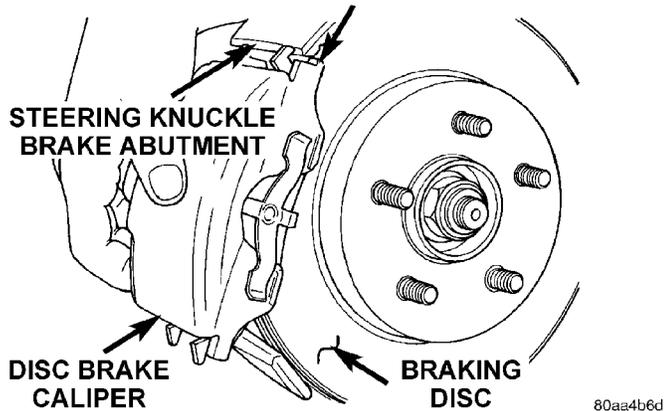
Installing Caliper Assembly On Steering Knuckle
